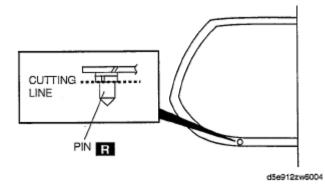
Identifying Cutting Line And Pin Courtesy of MAZDA MOTORS CORP.
